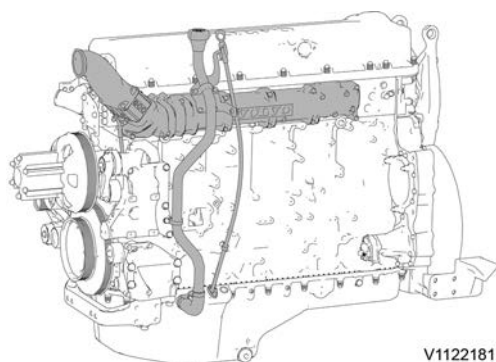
Inlet manifold with preheating coil, oil filler pipe, oil dipstick.
